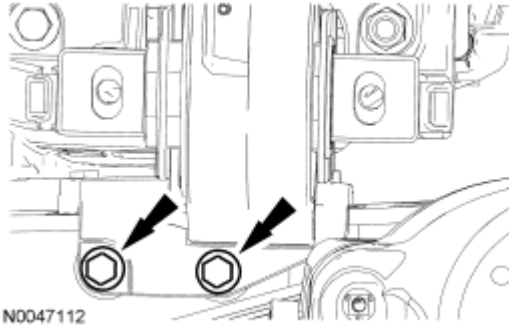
Locating Upper Bolts On Rear Transaxle Insulator
